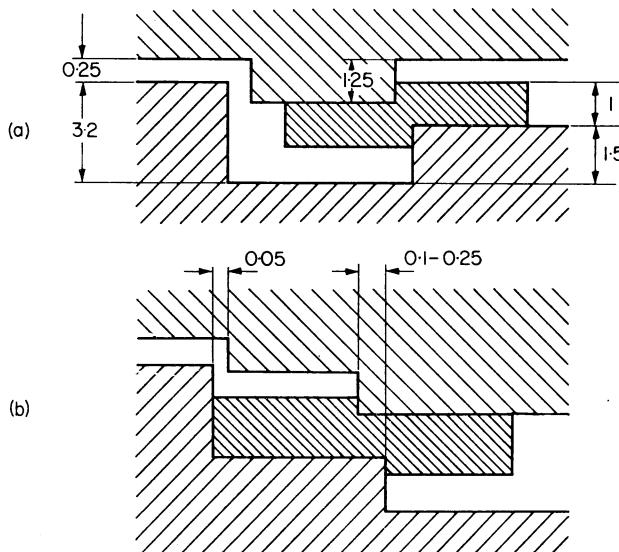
Shear seals; (a) with clearance between steps; (b) with overlapping steps (after Carmichael¹⁹⁴)
